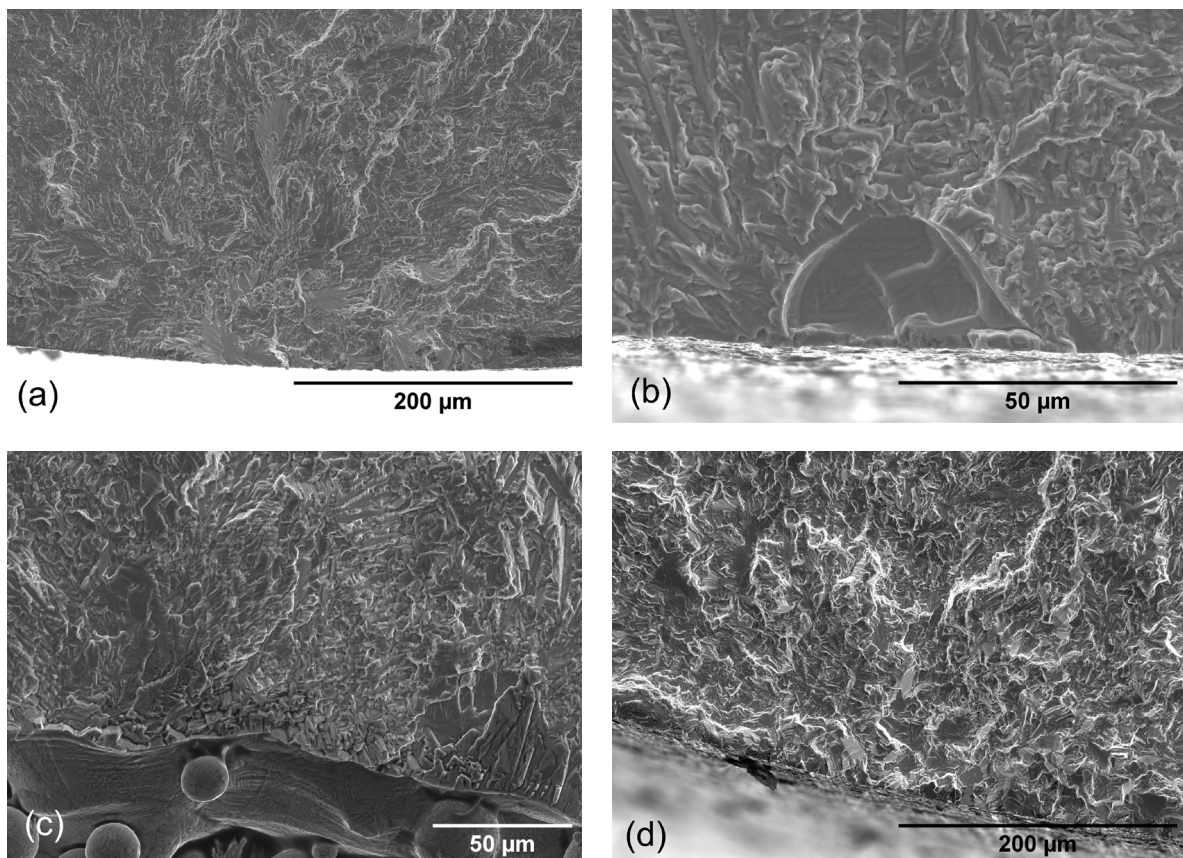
Fracture surface initiation sites from (a) machined surface EBM (HIP); (b) machined surface LPBF (stress-relieved); (c) as-built surface LPBF (stress-relieved); (d) machined surface wrought (mill-annealed) specimens.
